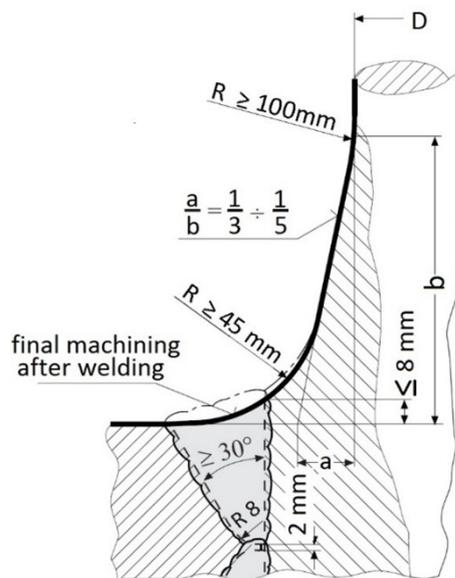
Welded joint between rudder stock and coupling flange
